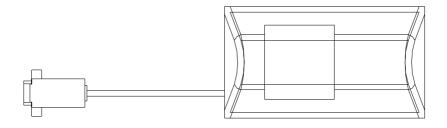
INFRARED SENSOR DIMENSIONS
